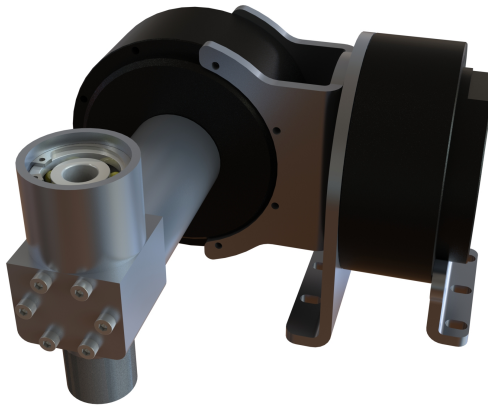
The shaft holder that is attached to the T-Motor and the tail shaft. The part is made up of five main parts, the motor connector, the T-joint connector, the encoder, the bearing shaft, and the bearings.
